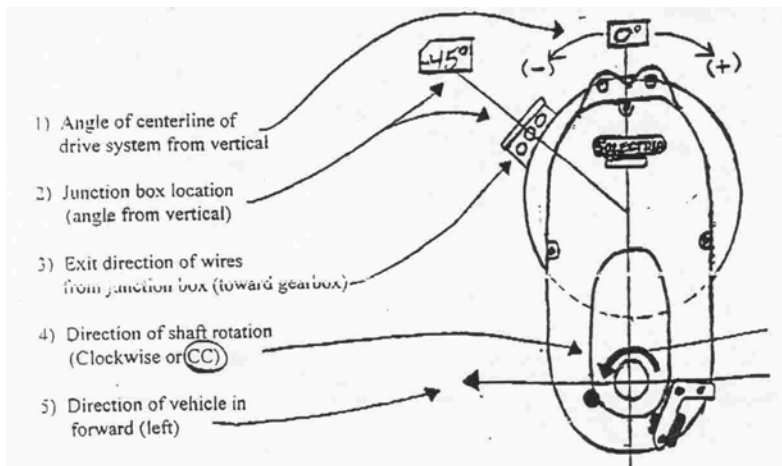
Solectria schematic of motor and gearbox assembly, information provided by Solectria.
